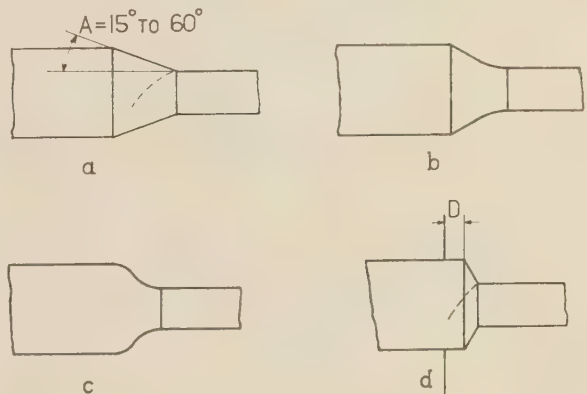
SHAPE OF THE ENDS OF THE SPECIMENS USED IN TORSION FATIGUE TESTS
